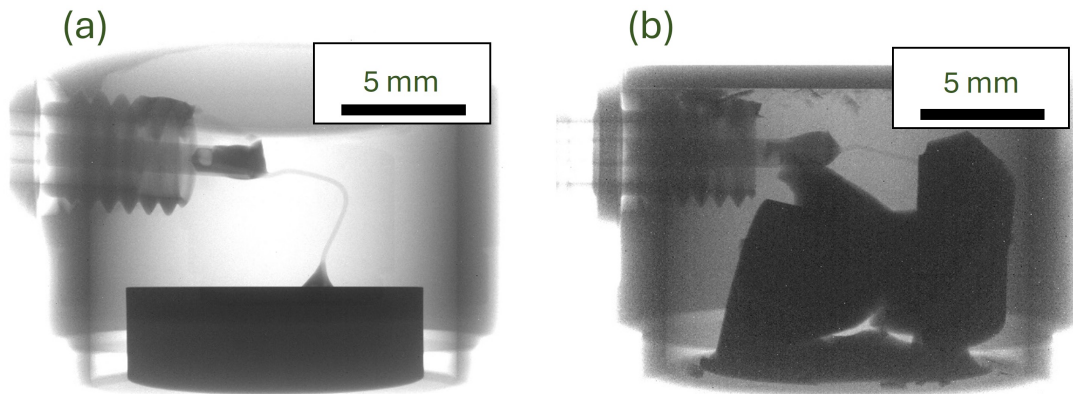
X-ray inspection of the VS900-M. (a) Before impact test. (b) After the impact test.
